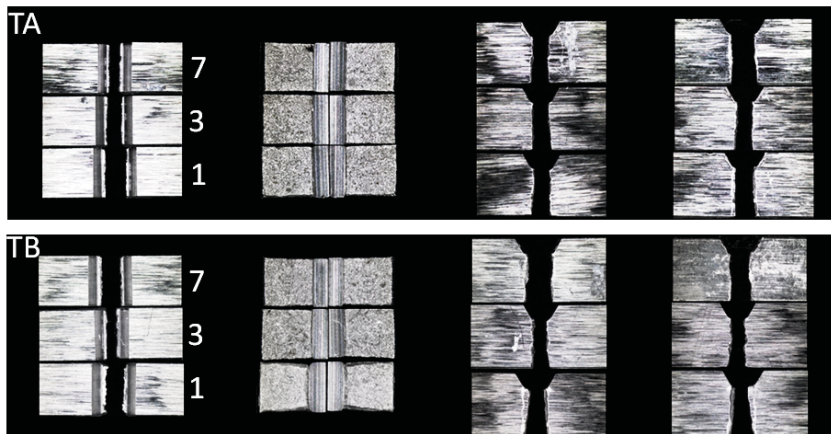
Fracture surfaces after from Charpy V - notch tests on micro samples performed at -40 °C.
